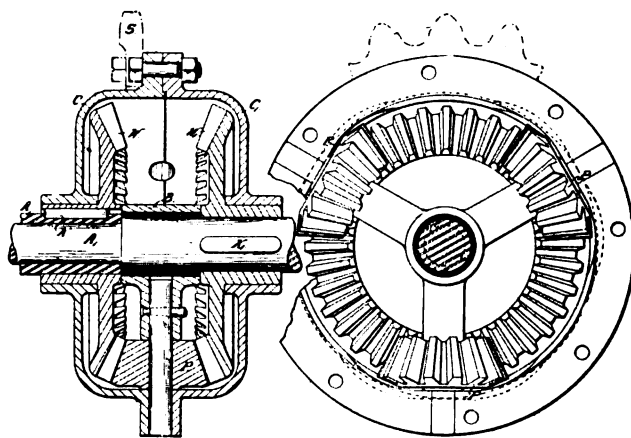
A BEVEL DIFFERENTIAL GEAR.
